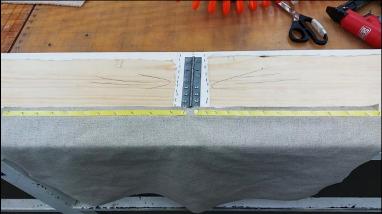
, 12 and 13. Proposed Hinge Assembly Test
